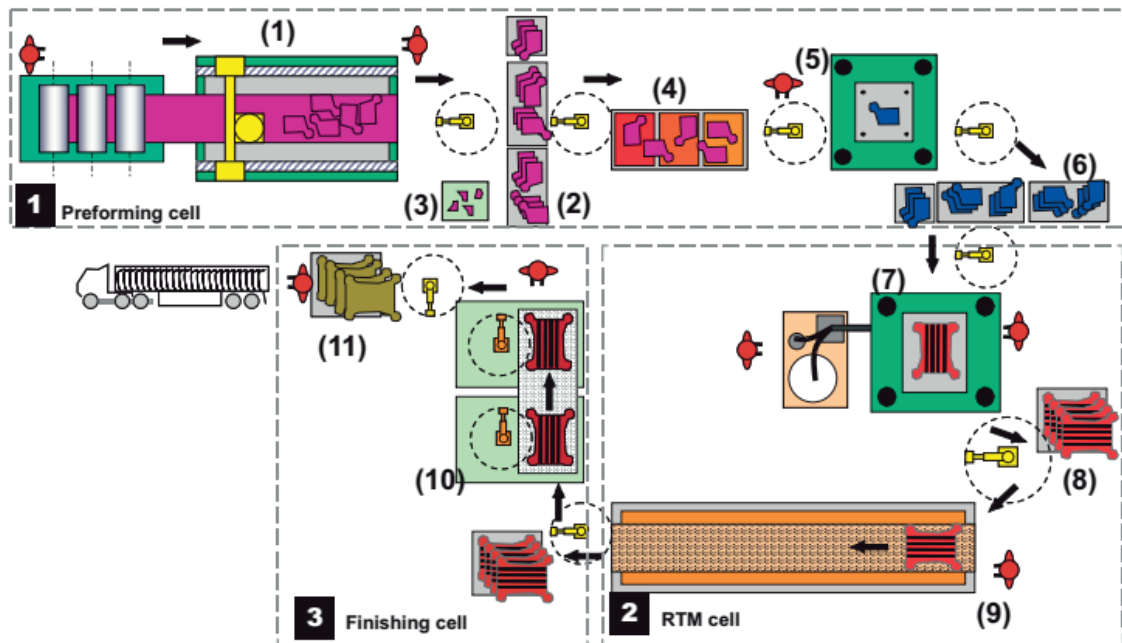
Plant diagram for production of 12,500 parts per year. (1) Ultrasonic cutting machine; (2) Buffer; (3) Waste buffer; (4) IR oven; (5) Preforming press; (6) Buffer; (7) RTM press with thermoset injection machine; (8) Buffer; (9) Post-cure oven; (10) Trimming cell; (11) shipping. Arrows indicate the flow of production. [328]
